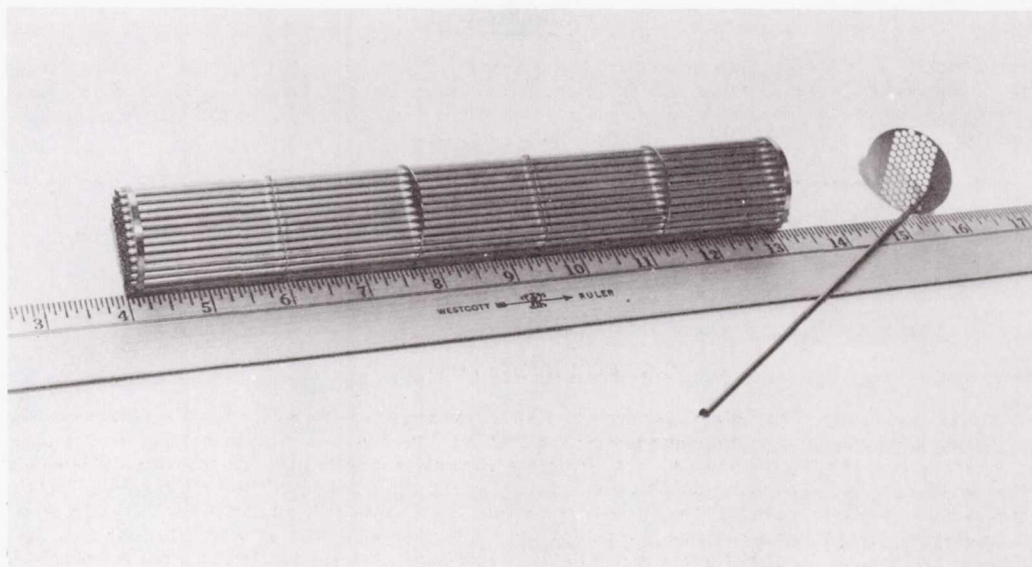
HEAT EXCHANGER MODULE TUBE BUNDLE
